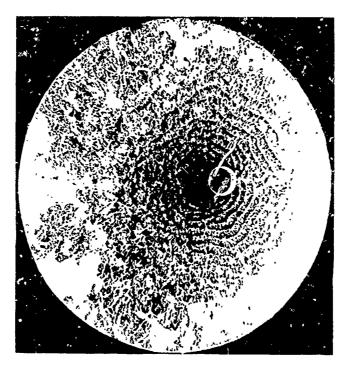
Typical fracture initiated by bubble in specimen under uniaxial tensile loading; test specimen diameter, 0.500 inch.
